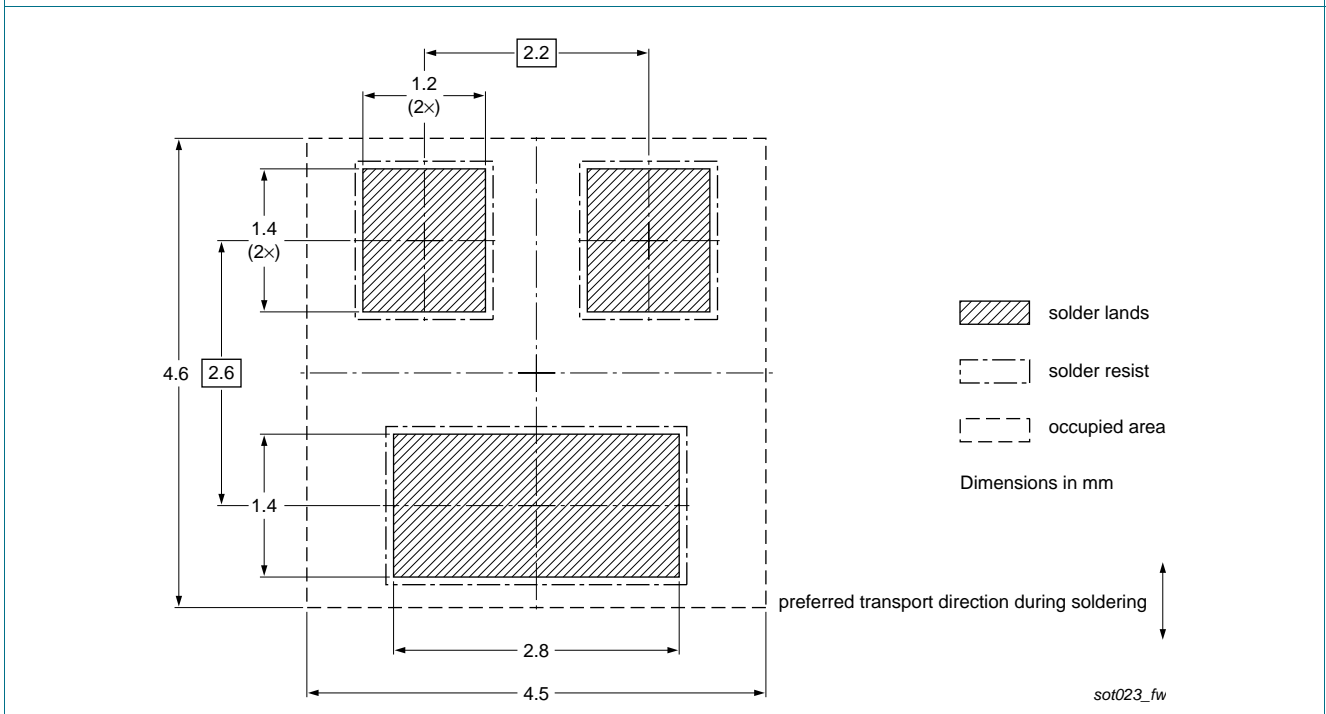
Wave soldering footprint for SOT23 (TO-236AB)
